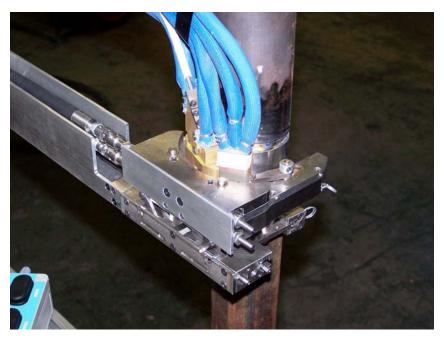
C-Frame welding approach used for CANDU reactor tubing.
